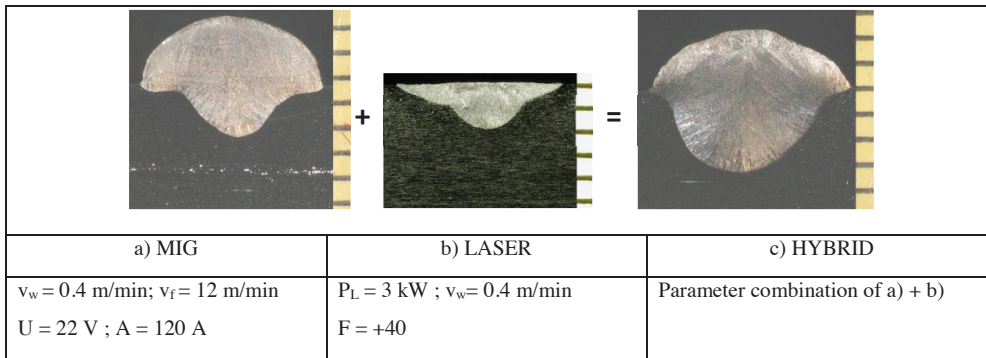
Macro cross-sections of bead-on-plate welds produced by a) MIG process alone, b) defocused autogenously laser process and c) combined laser-arc hybrid process of a) + b).
